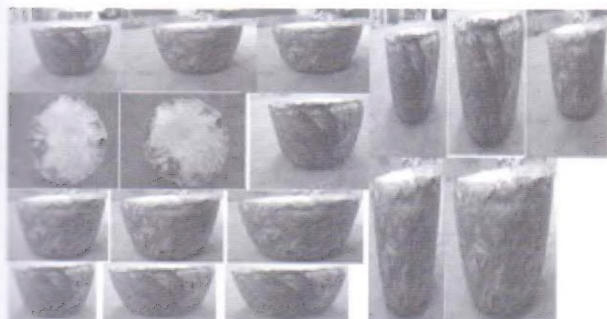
Produced 17 pieces of Metal Matrix Composites (C355+5%SiC)
